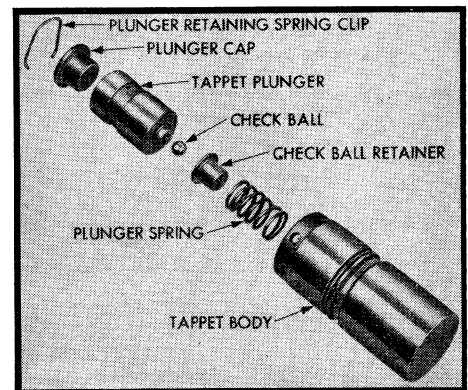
Hydraulic valve lifter of the ball check type. V8 engines
